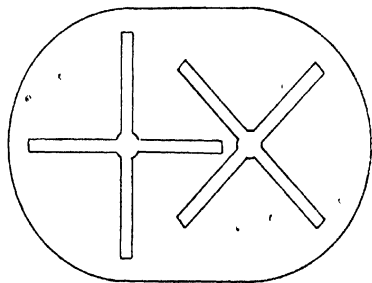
McRoberts Type Incorporating Machine (Plan).
